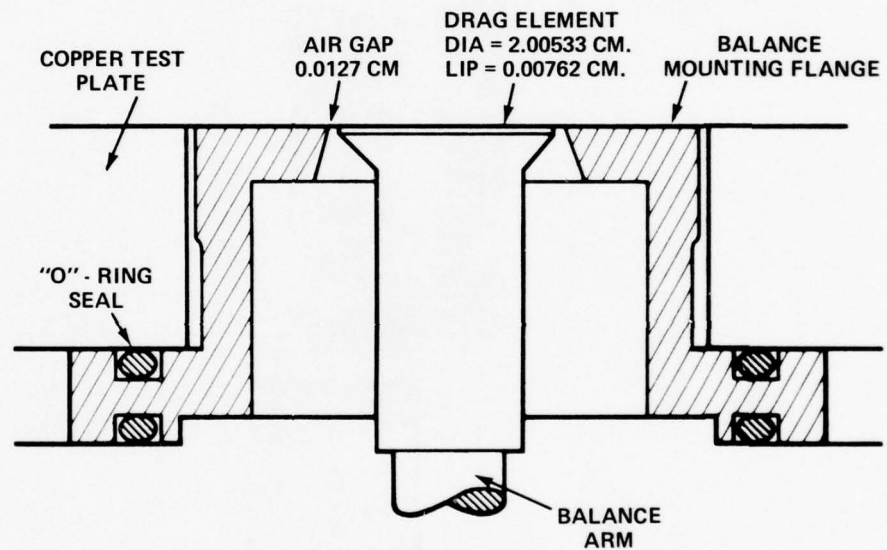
SKIN FRICTION BALANCE DRAG ELEMENT AND MOUNTING FLANGE
